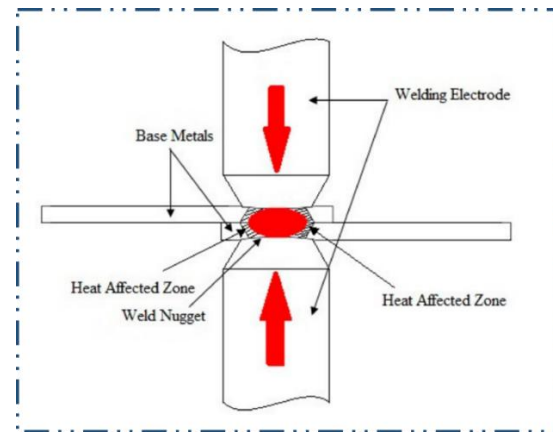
Resistance spot welding (RSW) process. [18]
